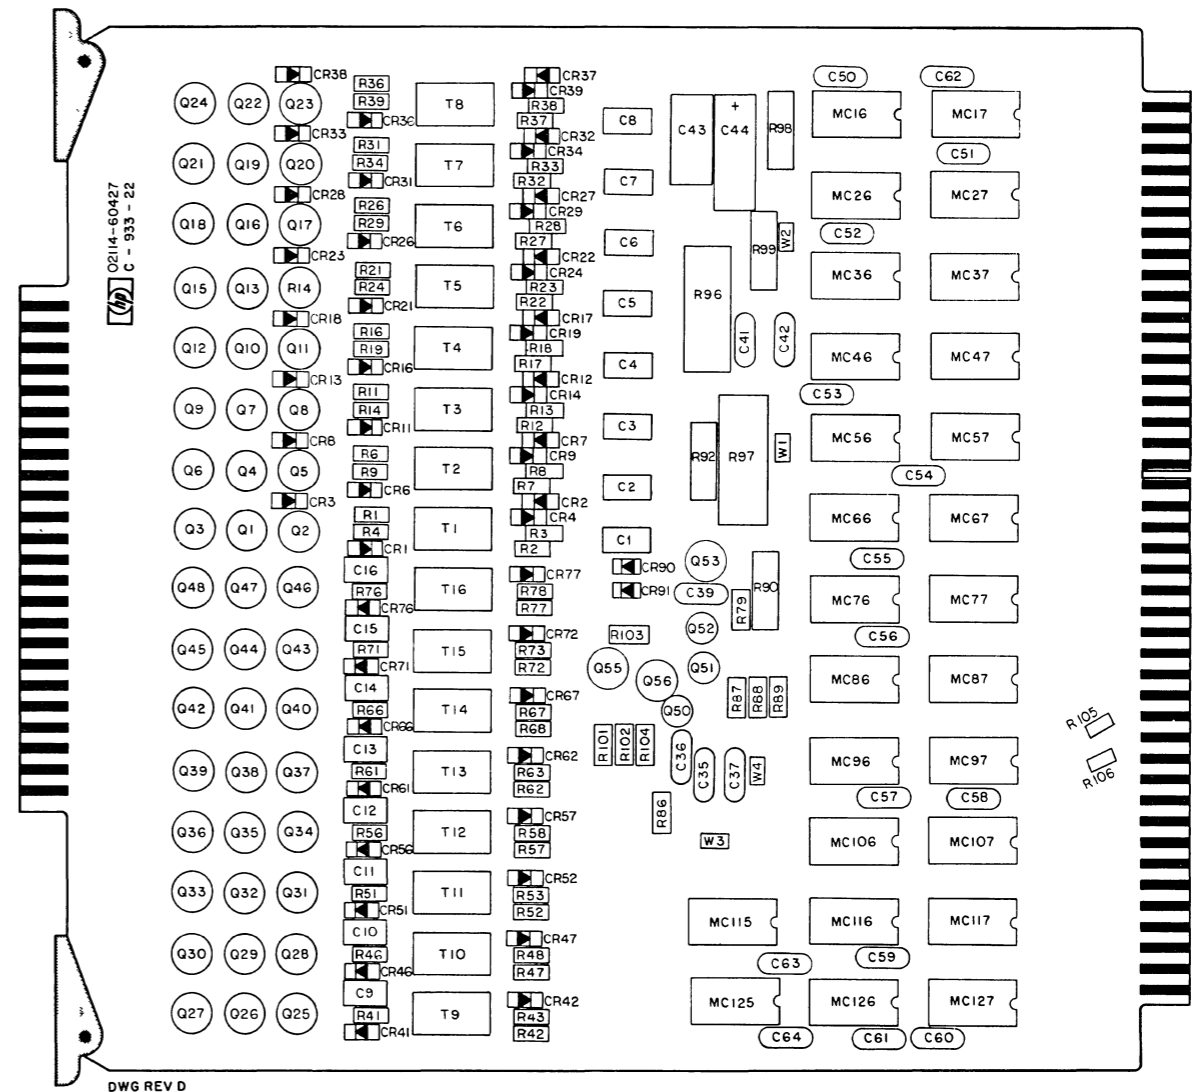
Driver/Switch Card (02114-60427), Part Location Diagram
